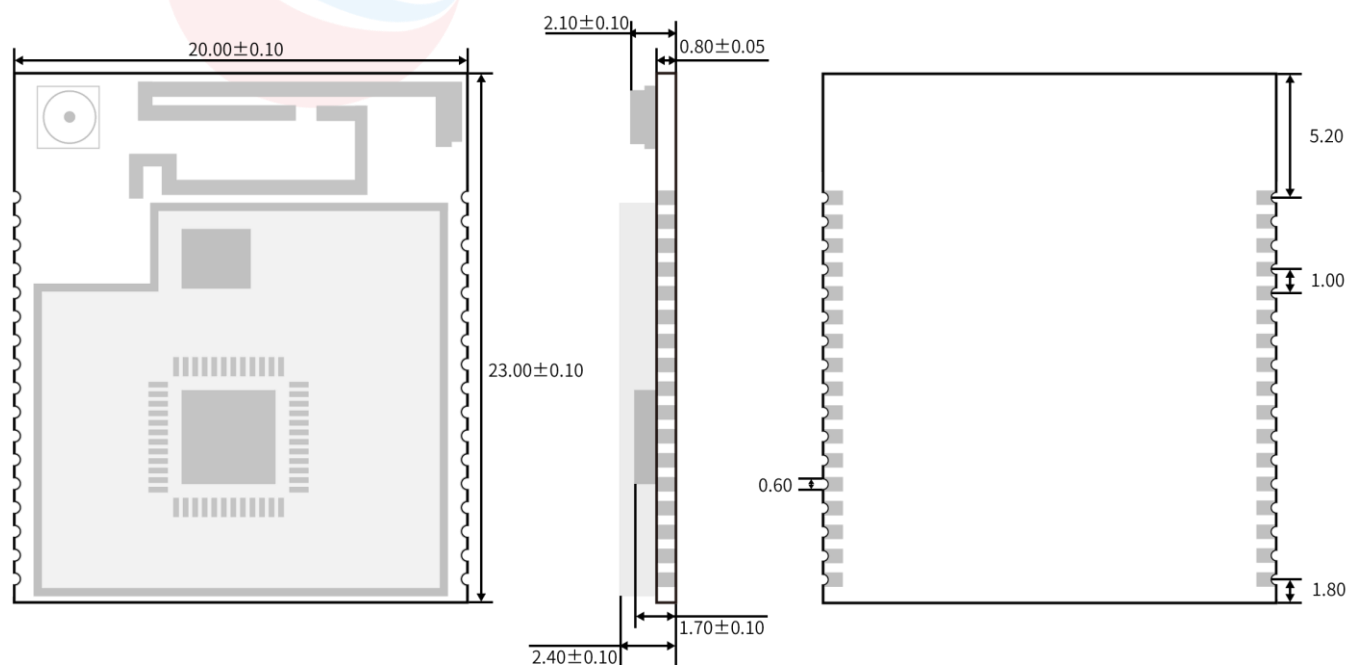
Recommended PCB Footprint of RF-WM-11AFB1 (mm)
